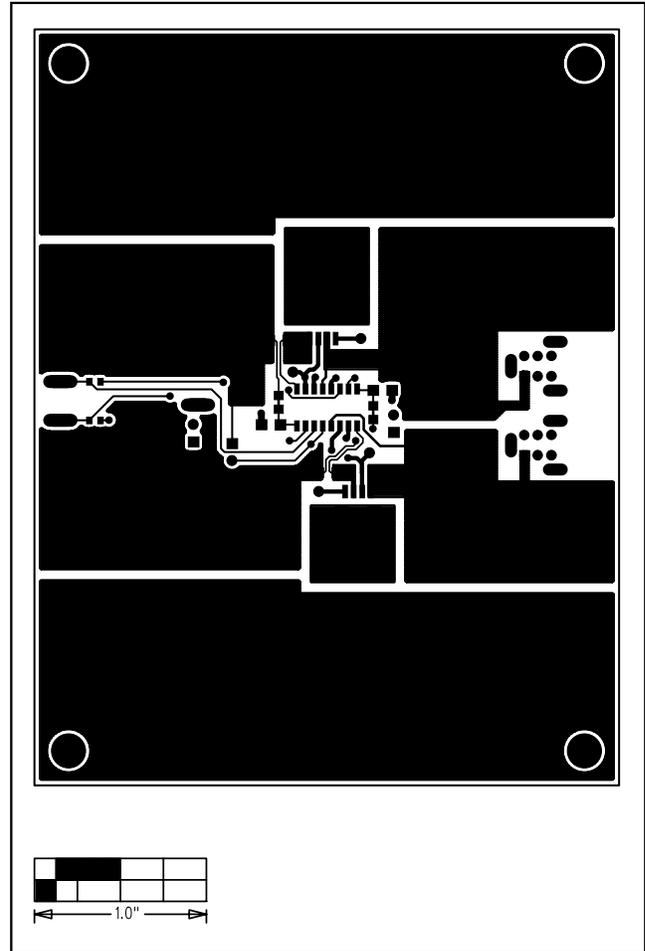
MAX5944 EV Kit PC Board Layout—Component Side
